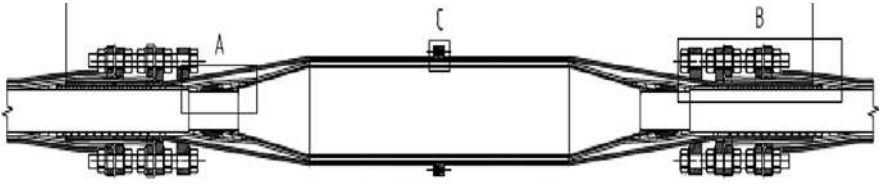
Copper and steel casing for a pre-moulded joint
